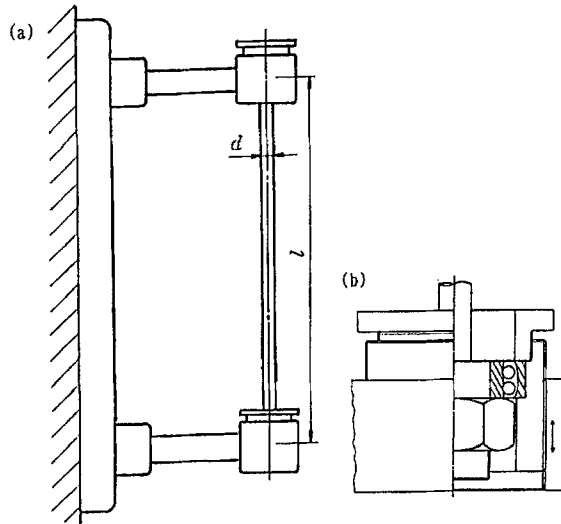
Experimental set-up: (a) rotor system and (b) details of the bearing and the pedestal.
